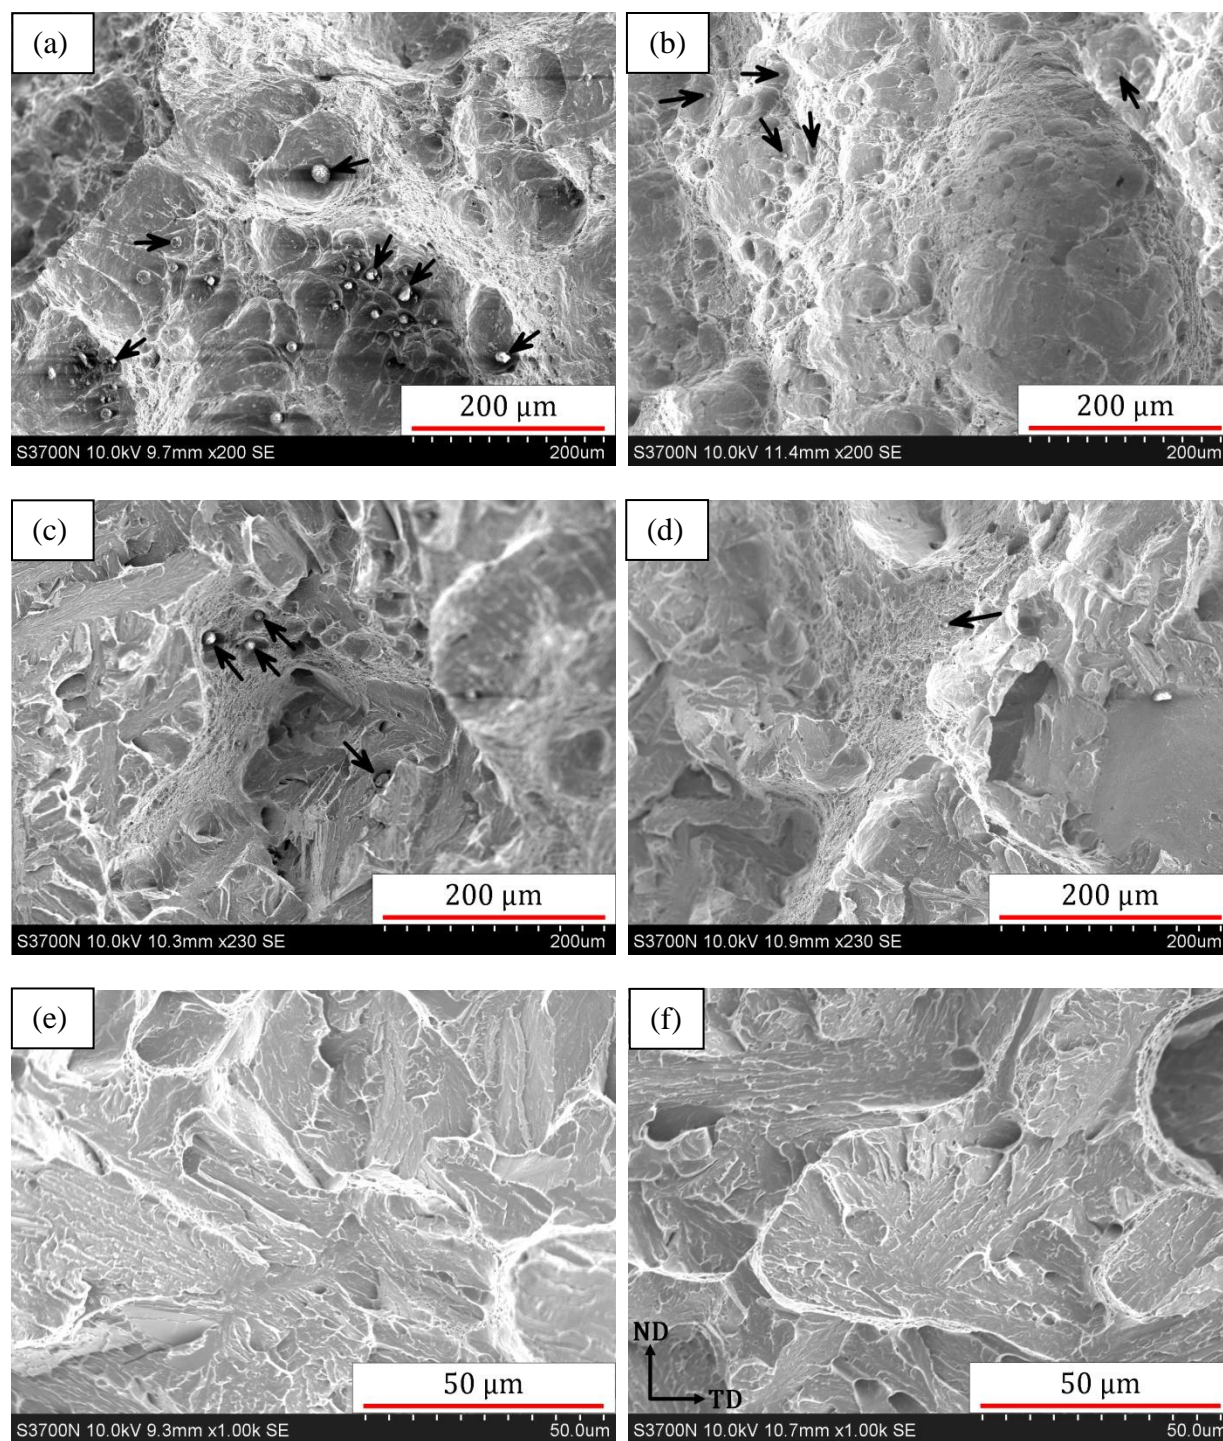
CVN fracture surfaces of CA6NM (a, c, e) and 415 (b, d, f) steels tested at 23 °C, -80 °C, and -190 °C; some intact/broken inclusions are shown by the arrows in (a) to (d)
